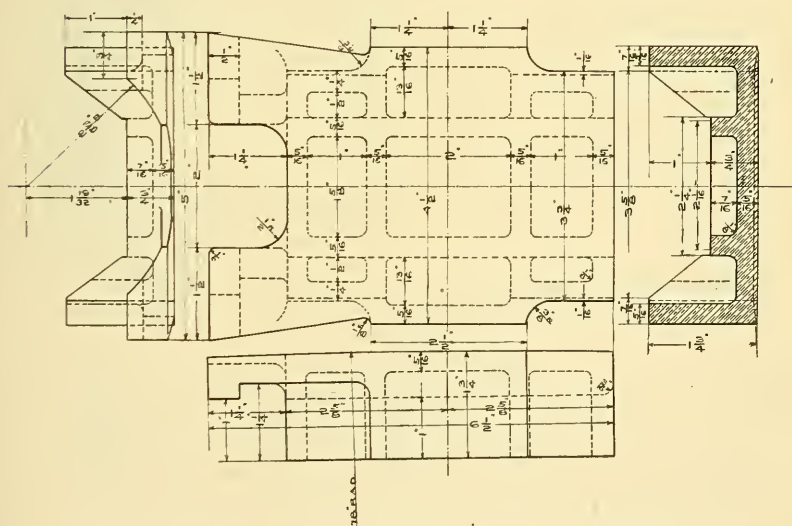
4x7 Journal Bearing Key for Cars from 20 to 28 Tons.
